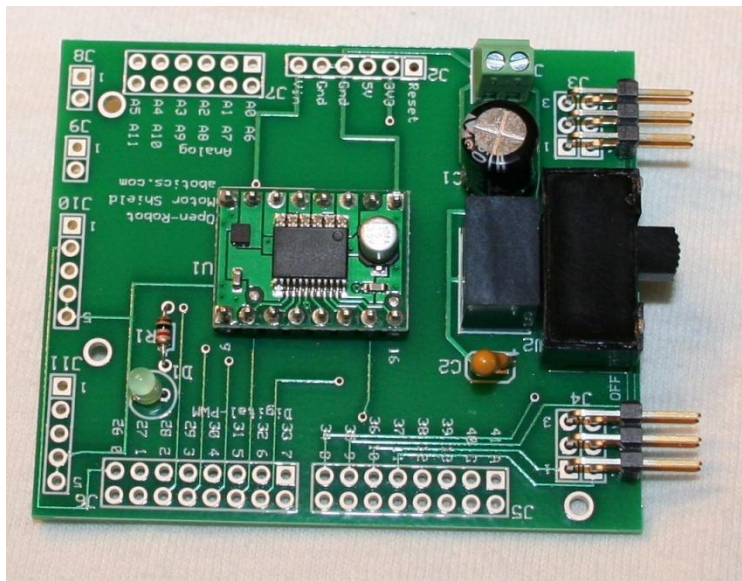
Solder 3x2 Right Angle Connectors, J3 & J4.
